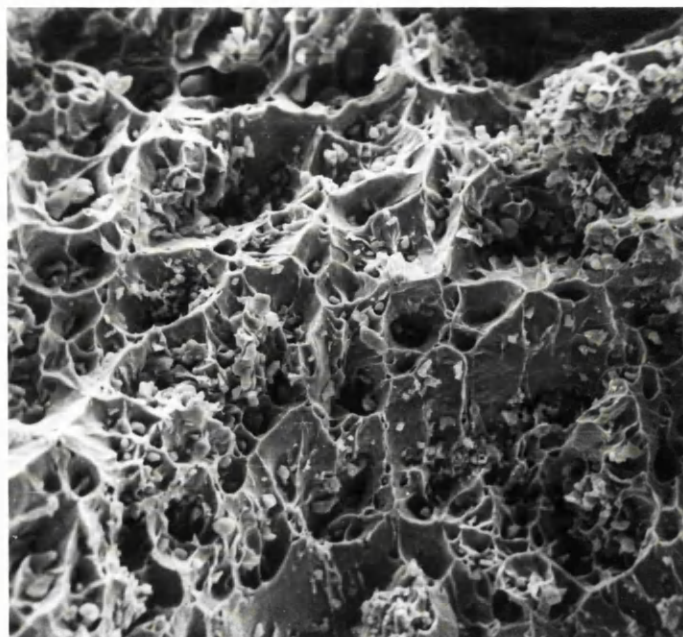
Fracture surfaces of sponge iron
